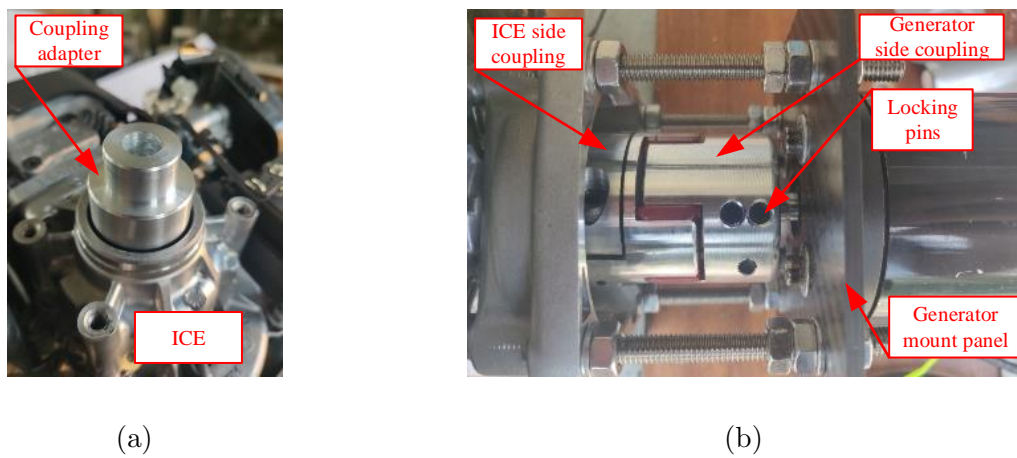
Coupling of ICE and electrical generator: (a) engine side adapter for claw coupling mount, (b) mounted claw coupling
